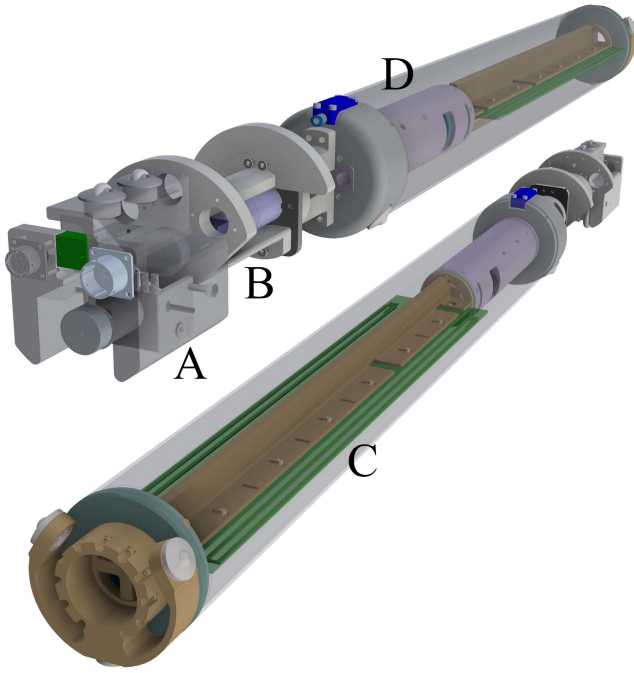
Rendering of the system from both sides. The tube is transparent to show the inner parts of the system. A—longitudinal displacement motor; B—rotation motor; C—rotating support shaft with the PCB; D—probe base with electronics.
